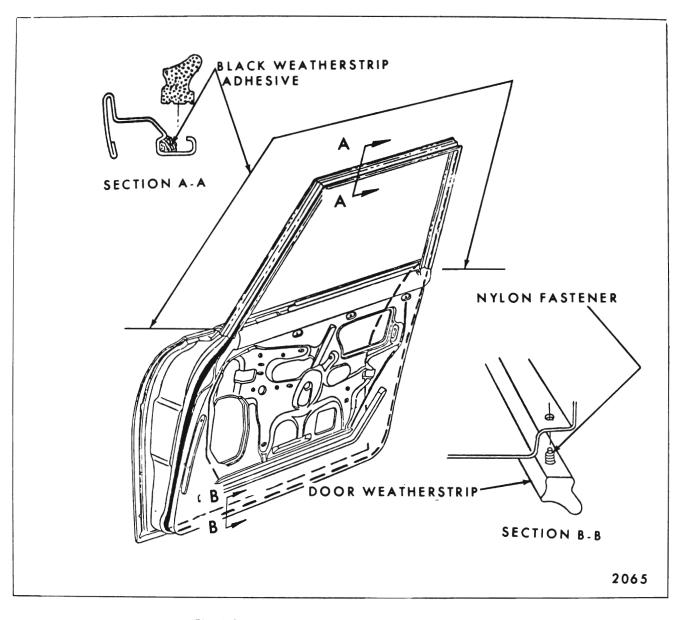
Door Weatherstrip - "A & X" Closed Styles
